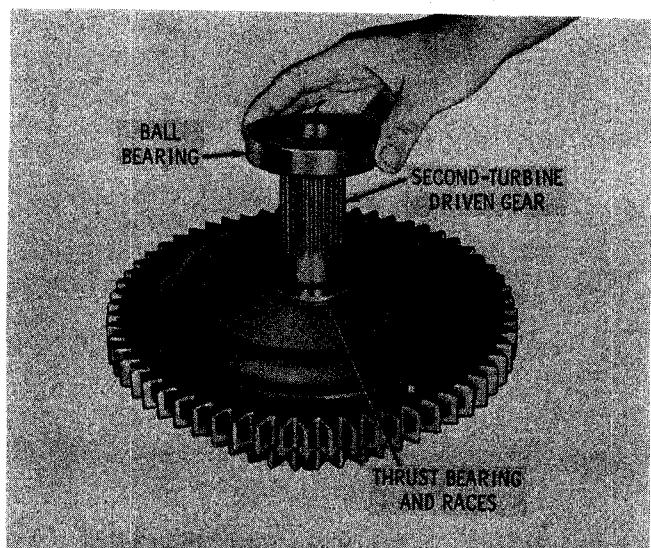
Installing ball bearing onto second-turbine driven gear shaft
